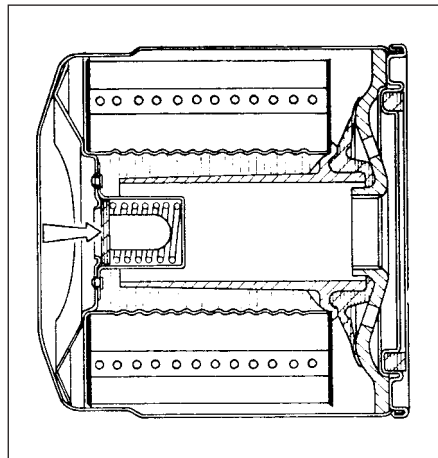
Sectional view of oil filter. Bypass valve arrowed (Sec 2)
